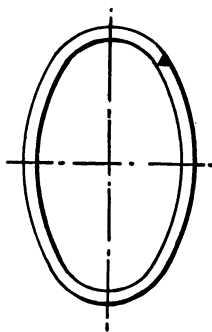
Oval-shaped bicycle tubing with welding seam outside the line of strain.
